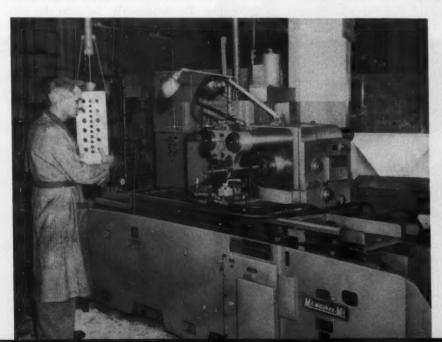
Cylinder-block forging (Fig. 10) is undergoing initial machining. Ganged cutters finish four surfaces simultaneously in one pass of the table. Although basically a riseand-fall bed type machine, this installation also permits automatic production milling.
